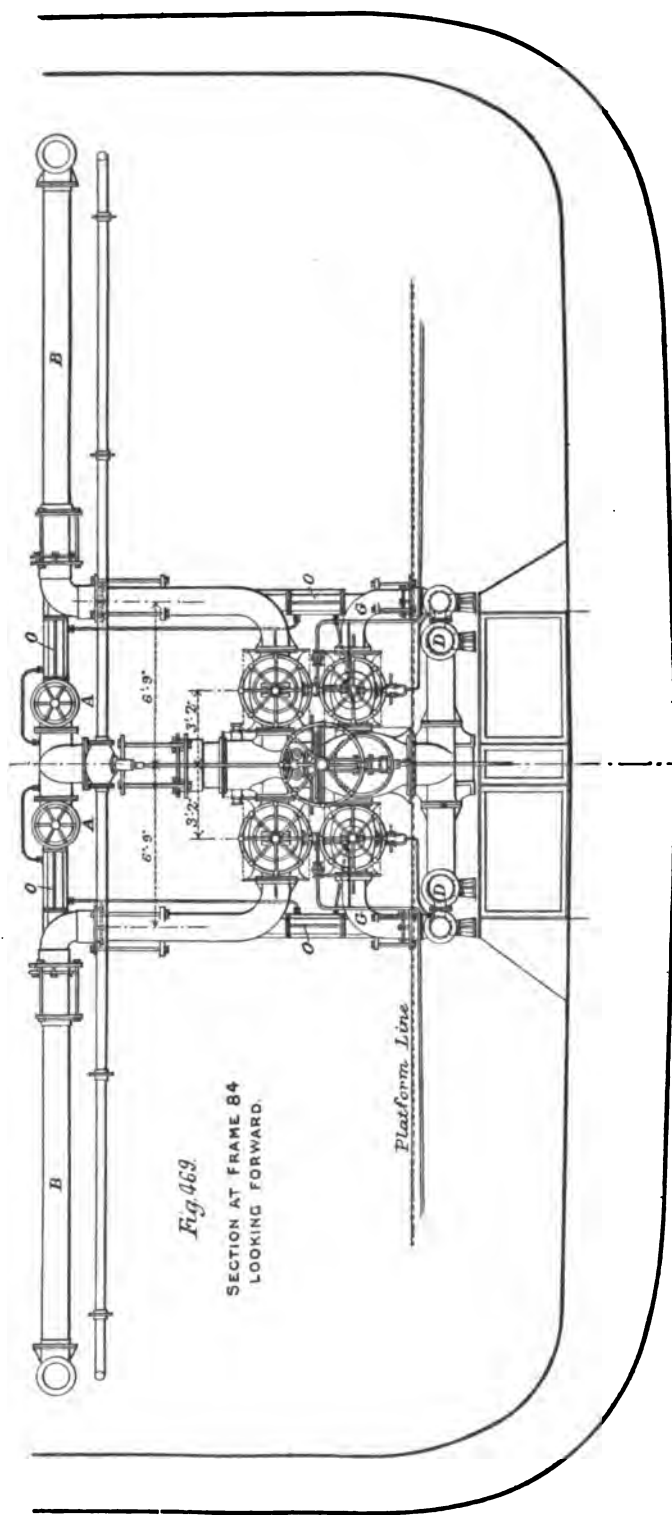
Maneuvering Valves for Marine Steam Turbine.
